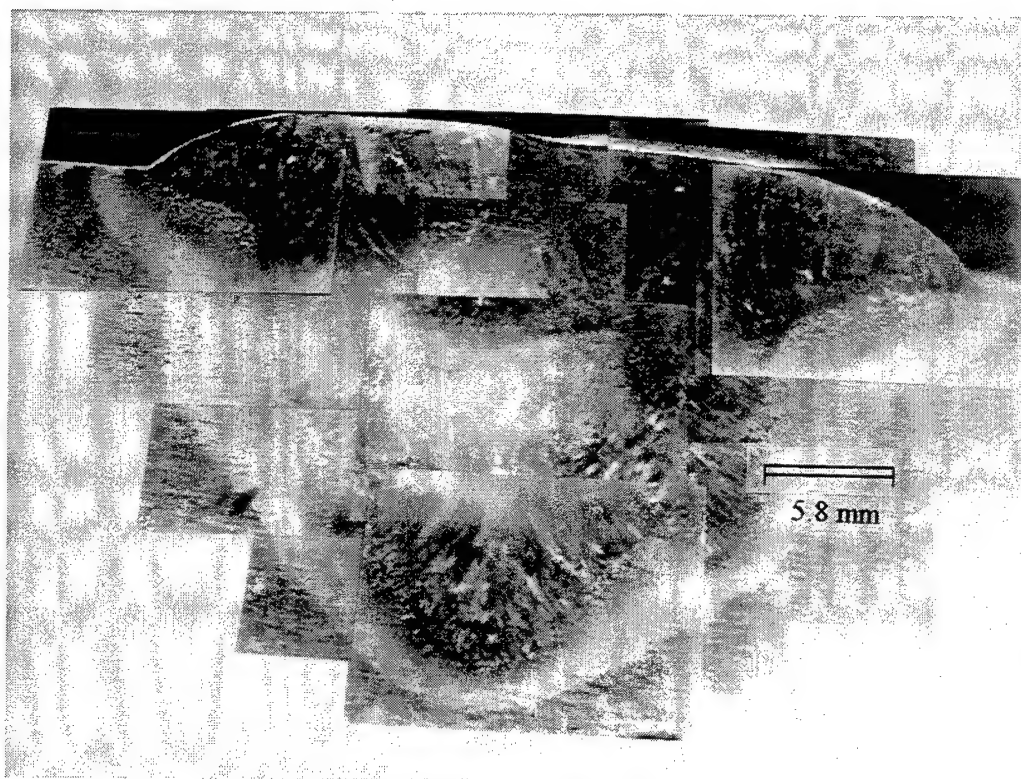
Representative Macrograph of a Gas Metal Arc Weld
